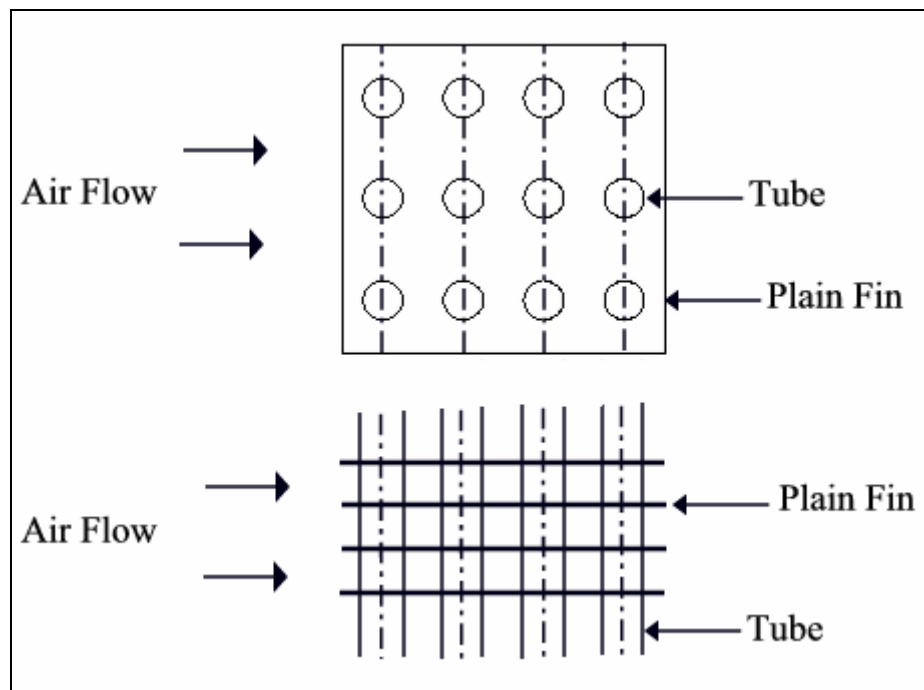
Plain plate fin-and-tube heat exchanger with in-lined tube layout
